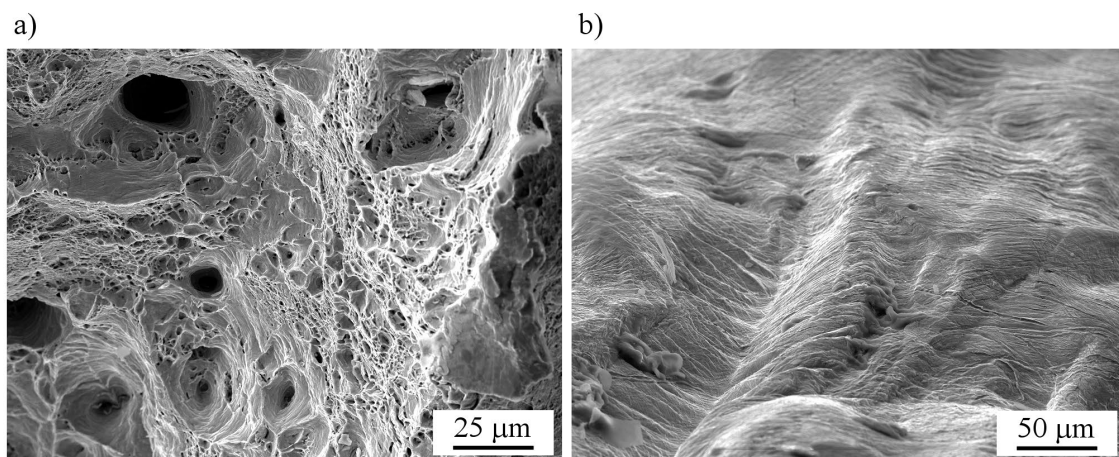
Detail of fracture surface of tensile specimens for the cast variant at RT. Typical ductile dimples on fracture surface (a) and wrinkles on the cylindrical part of specimen resulting from strong plastic deformation in the area of necking (b).
